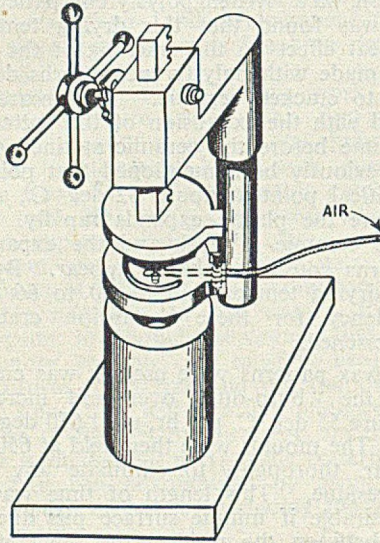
AIR-PRESSURE CASTING MACHINE FOR INVESTMENT MOULDS.
